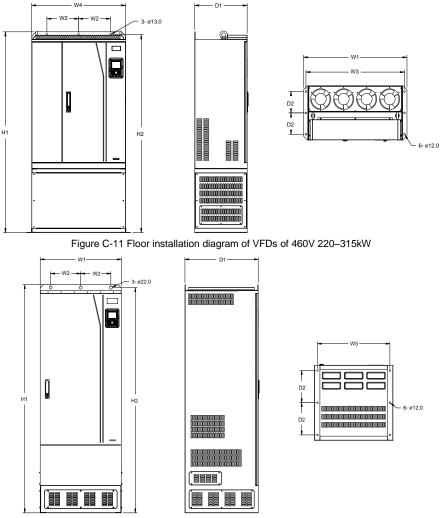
Floor installation diagram of VFDs of 460V 355–500kW
